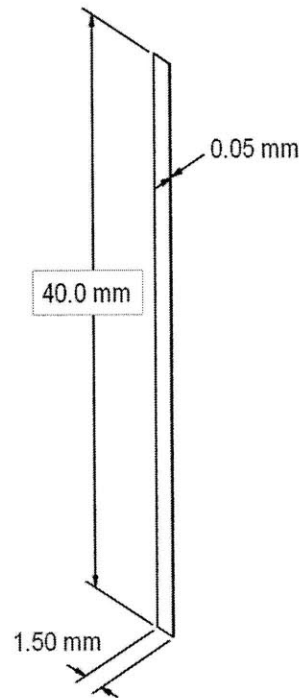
Drawing and dimensions of final tendon design for SquishTendons.
